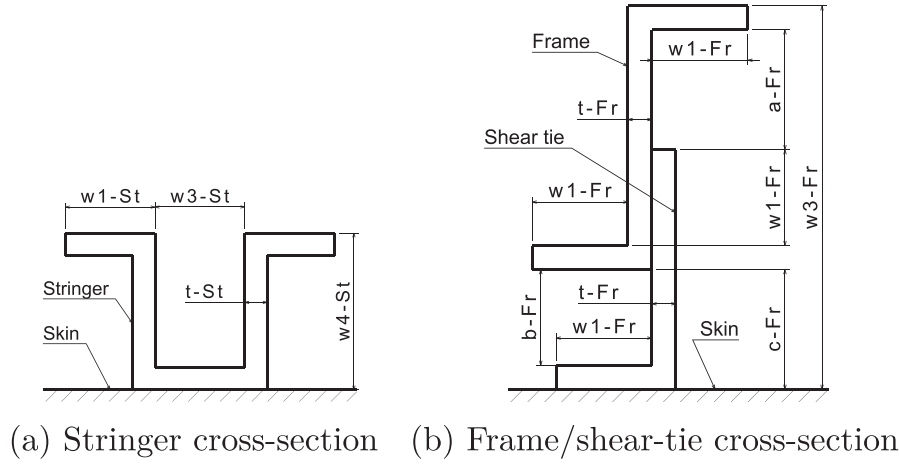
(a) Stringers and (b) frame/shear-tie assembly cross-sections variables definition.
